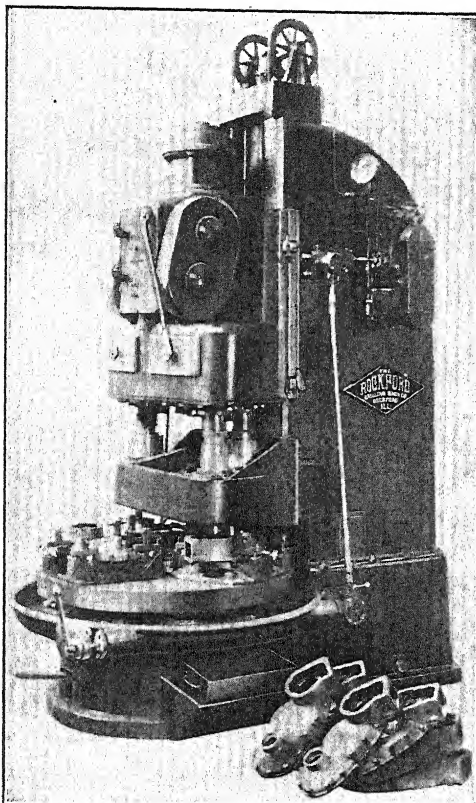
The Rockford Drilling Machine Co. Vertical-Type Hydraulic Feed Machine.
